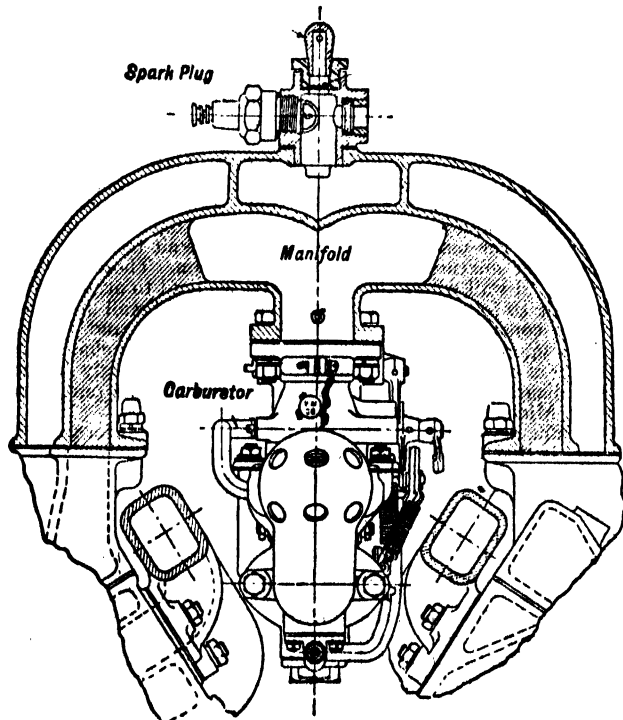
Cross section of Fuelizer on Packard "Twin-Six" engine.
